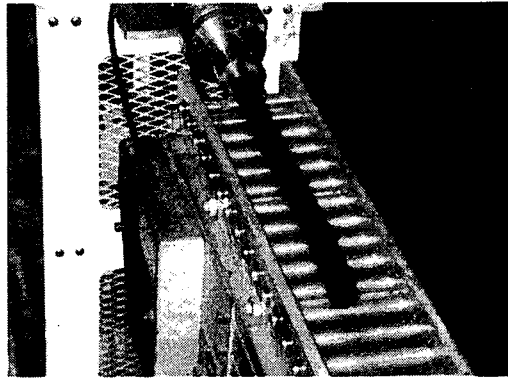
A photograph showing fabrication of tubular support by extrusion forming machine.
